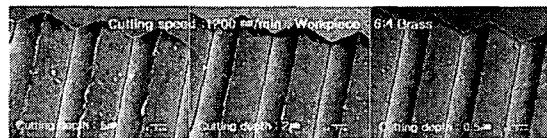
Machining result of prismless type LGP mold in 6:4 brass
